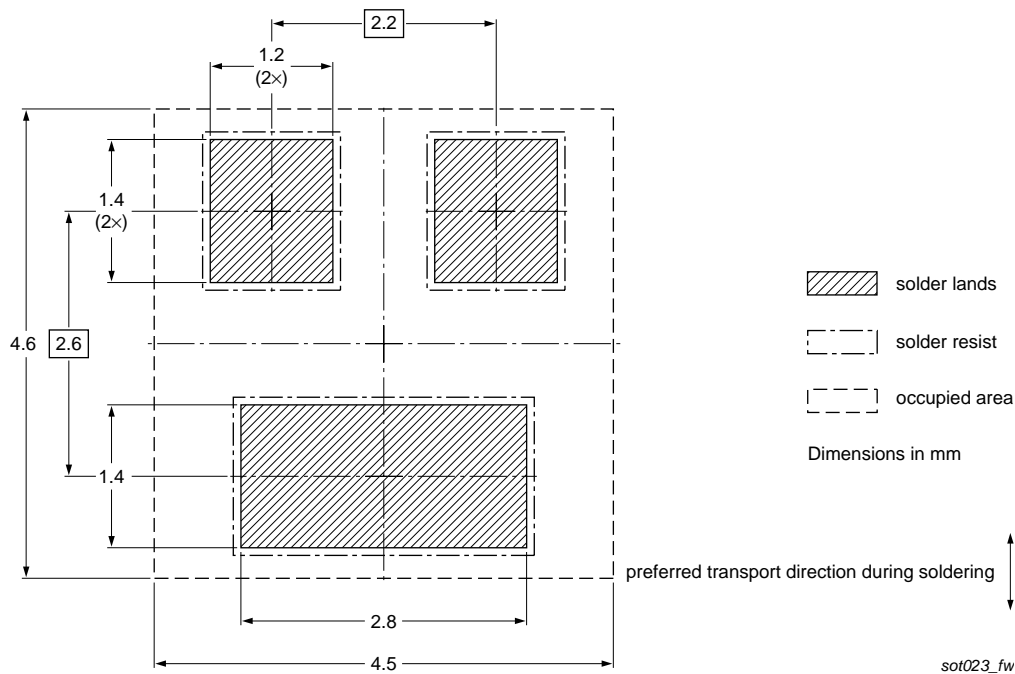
Wave soldering footprint for SOT23 (TO-236AB)
